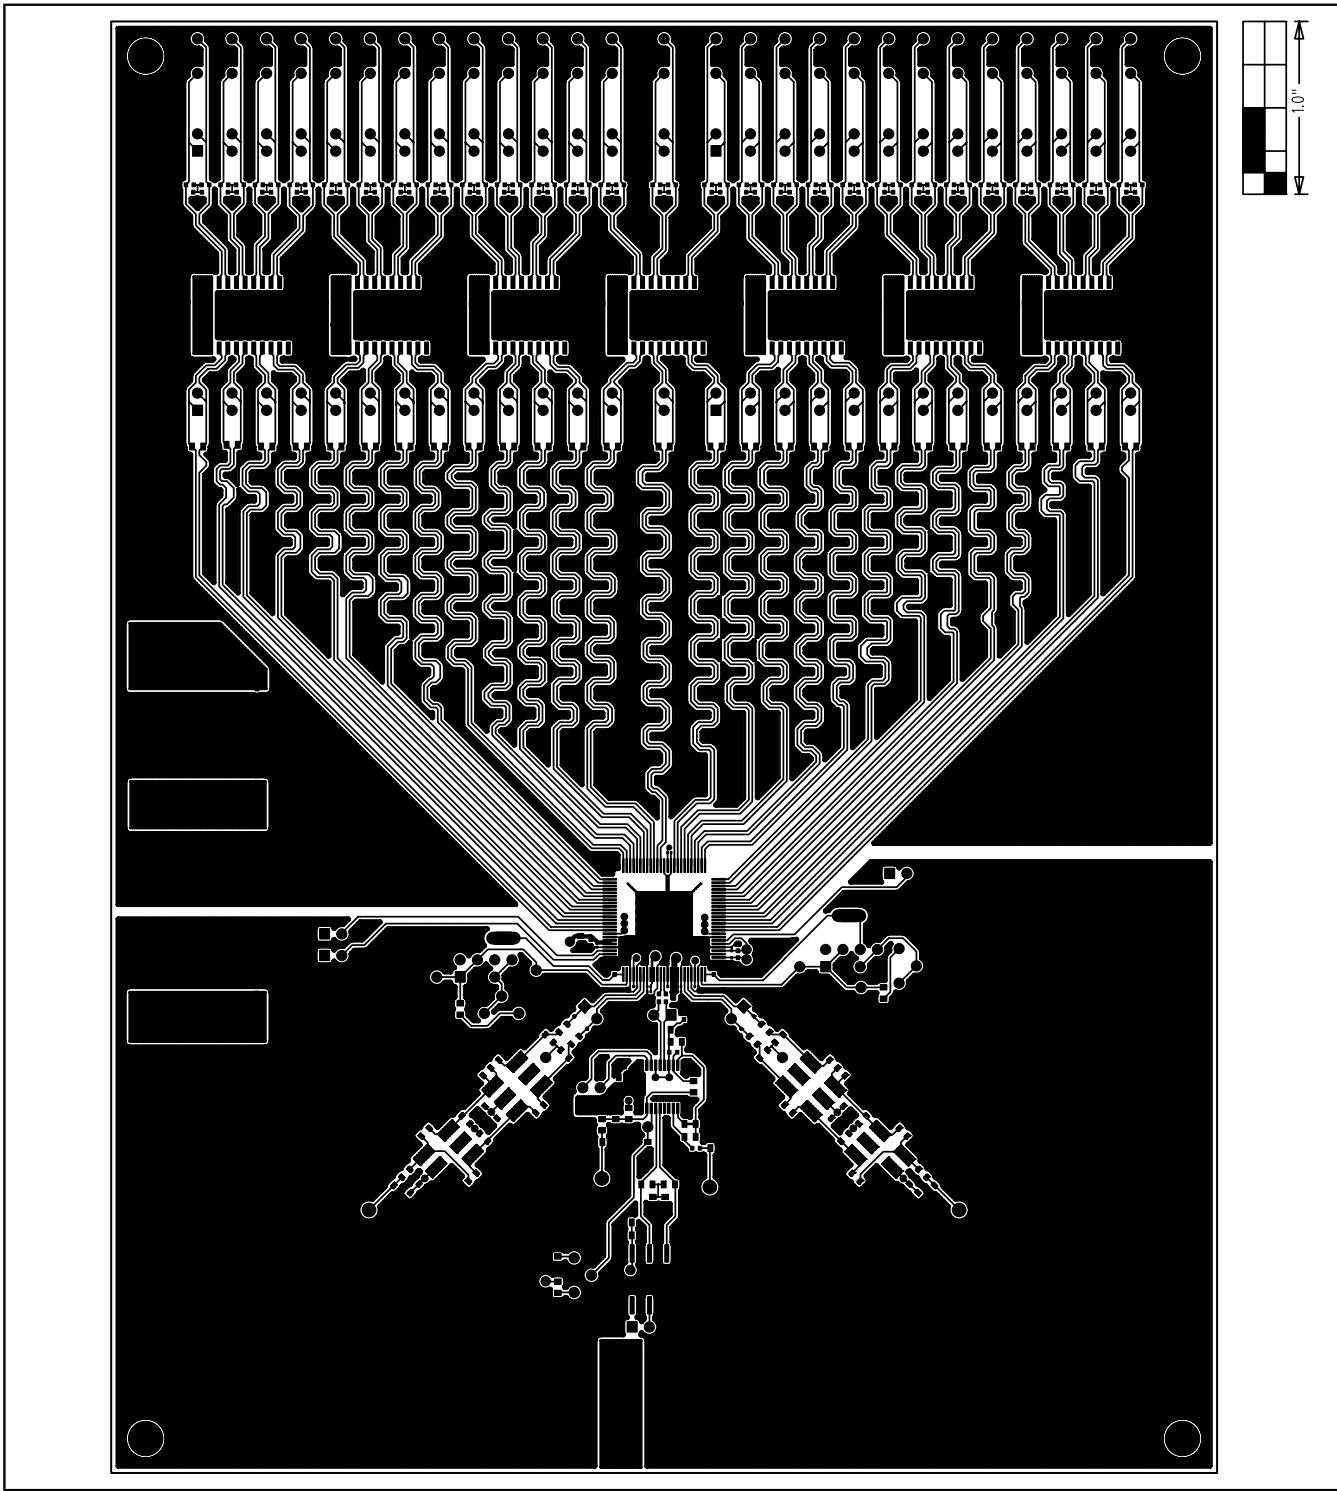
MAX1217/MAX1218/MAX1219 EV Kit PC Board Layout—Component Side
